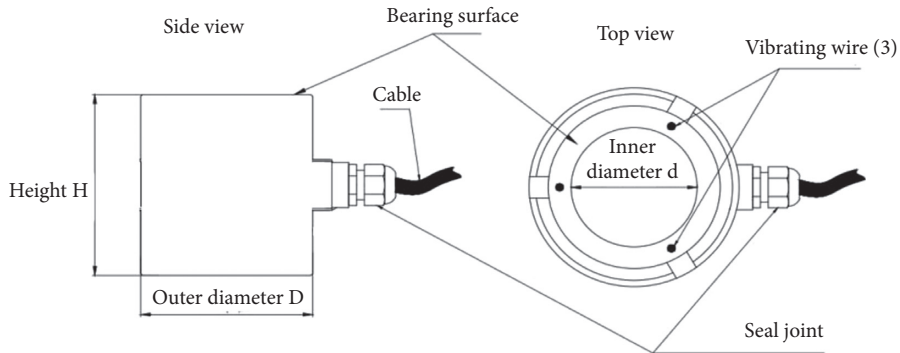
Structural diagram of a vibrating wire anchor cable meter.
